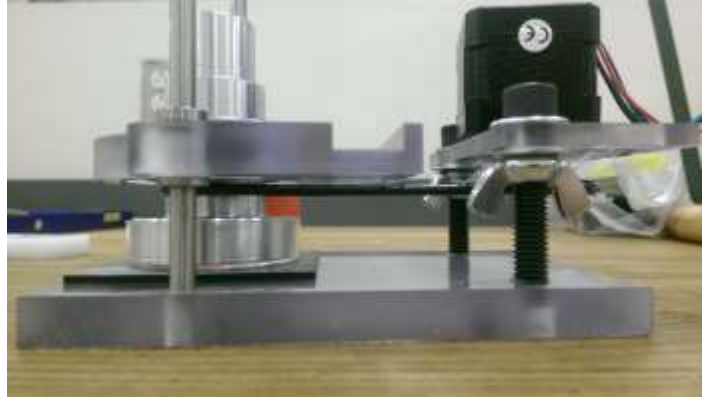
Side view of the drive belt (black) connecting the cone shaft and motor
